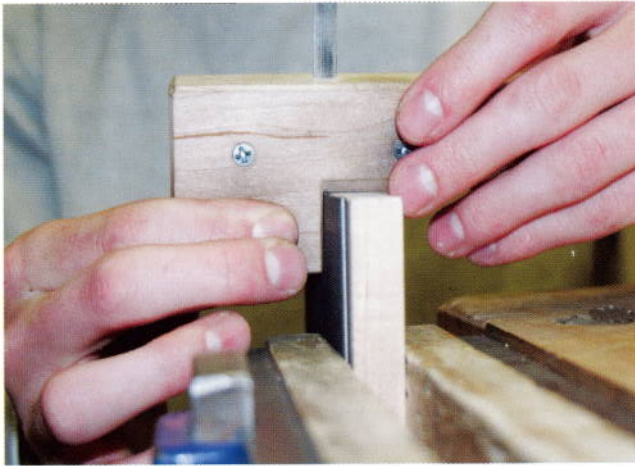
Scratch stock with v shaped cutter in the corner
